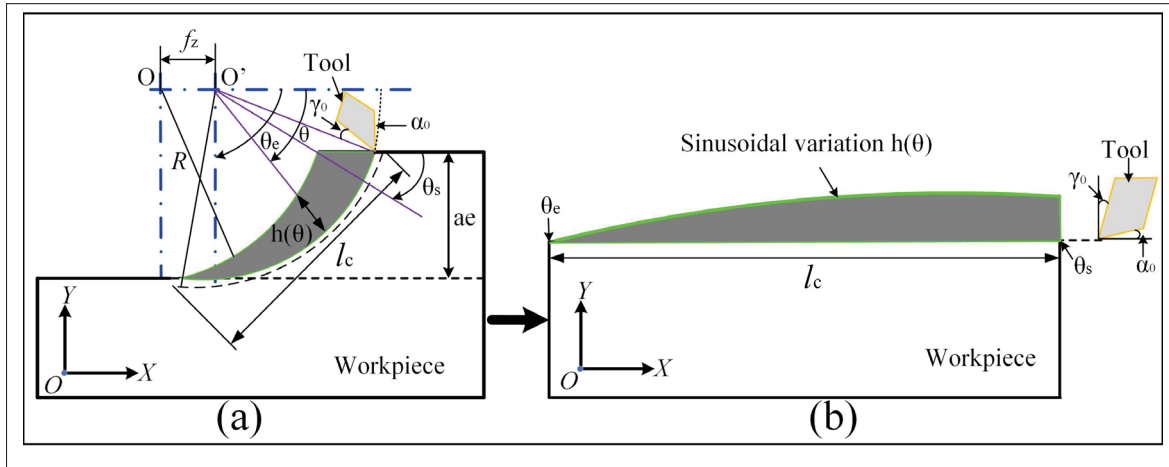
Geometrical conversion of milling processes: (a) 3D milling model, and (b) 2D cutting
